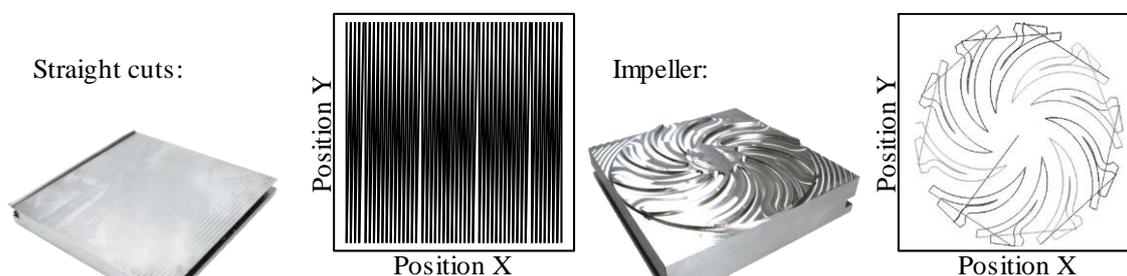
Overview of the two workpiece geometries: straight cuts and impeller.
